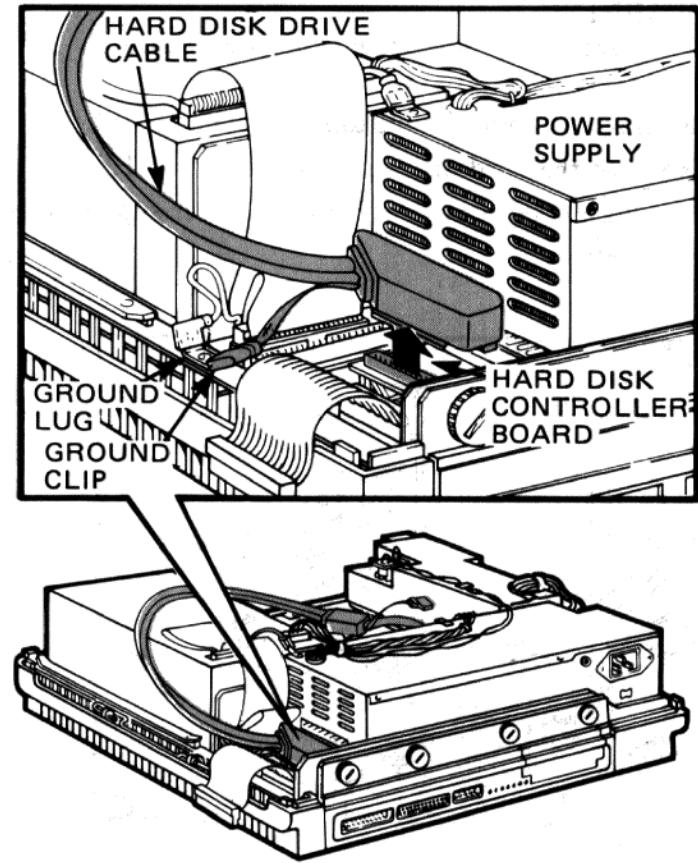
Hard Disk Drive Cable Removal from Controller
